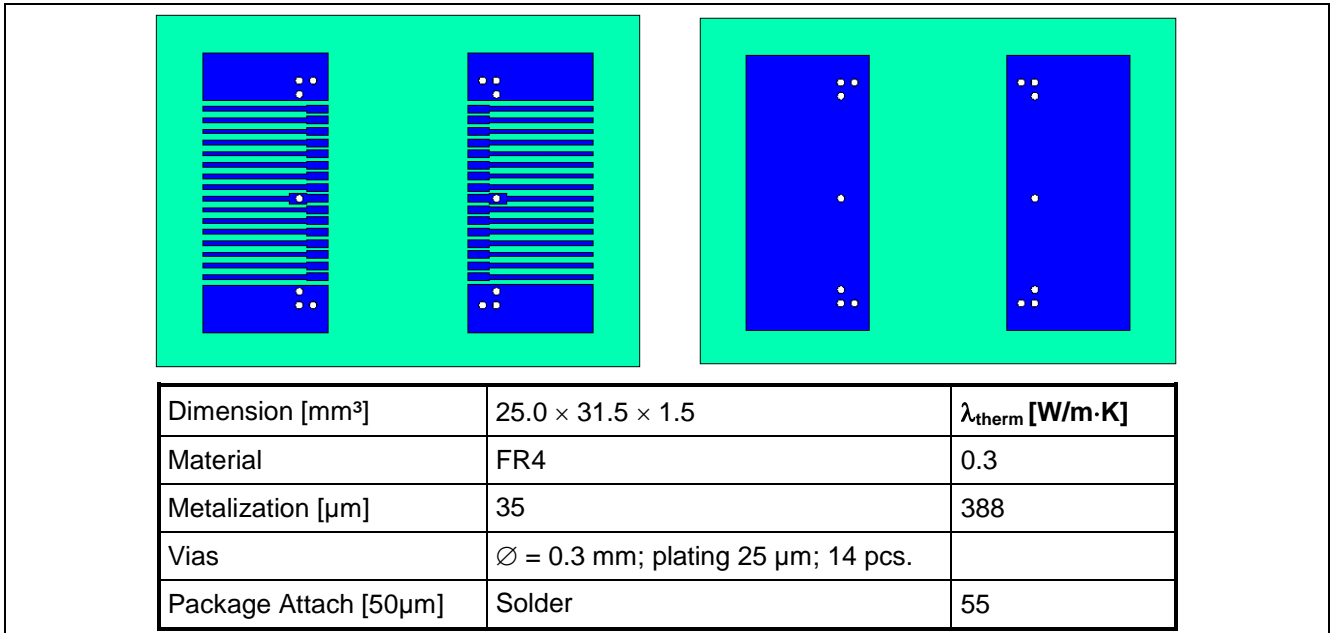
PCB reference layout (left: top layer, right: bottom layer)
